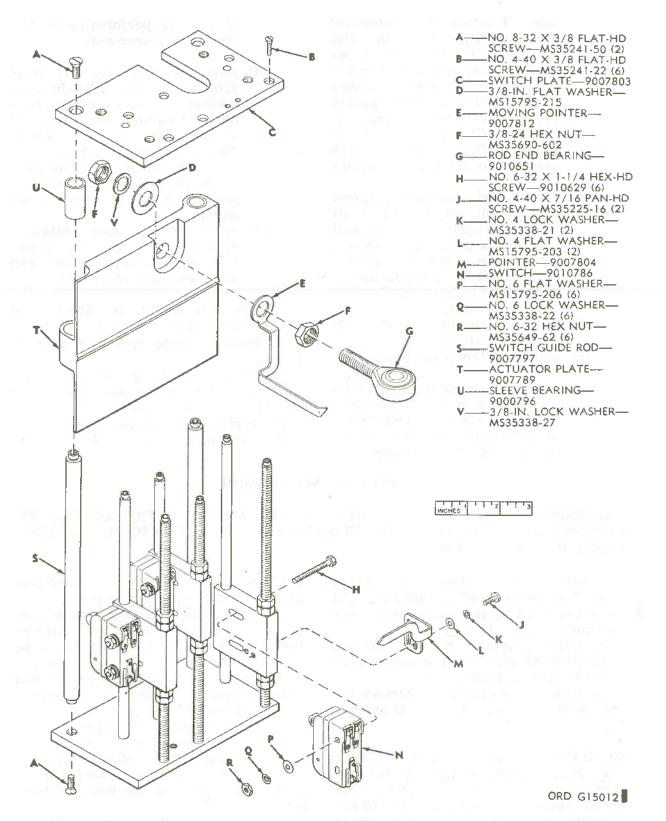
Disassembly and assembly of switch assembly - 9007825.
